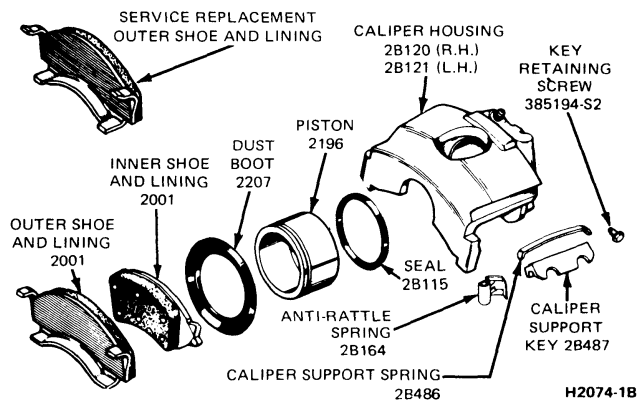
Disc Brake Caliper—Disassembled—LD Sliding Caliper
